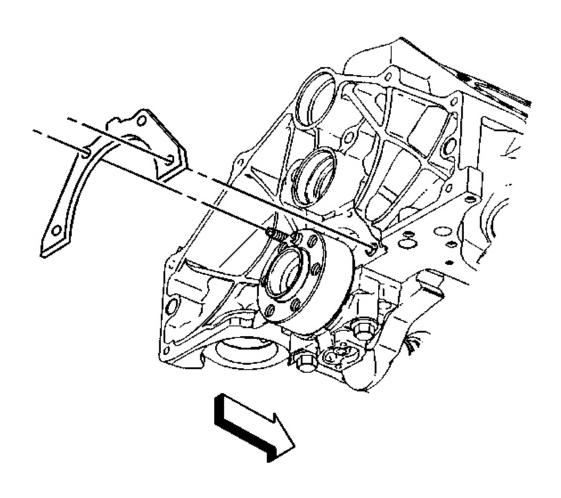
Locating Crankshaft Rear Oil Seal Housing Gasket Courtesy of GENERAL MOTORS CORP.
